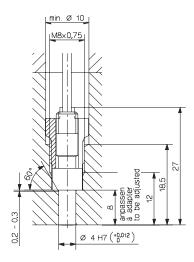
Mounting Type 6192B... with mounting nut Type 6457
